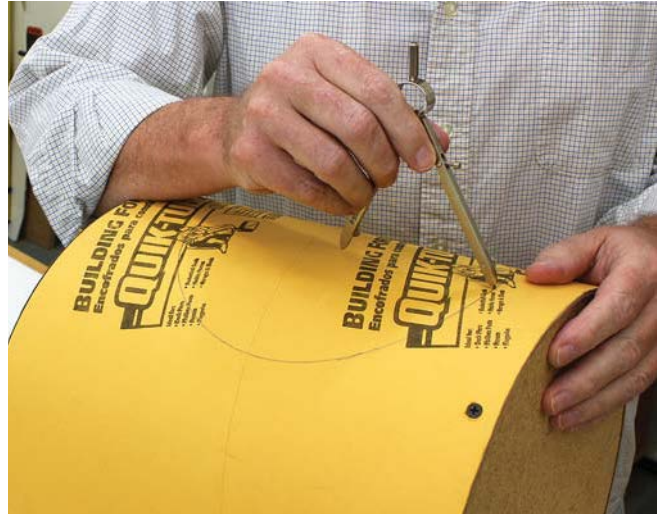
Scribe the condo opening on the tube with a compass, and then cut it out.
